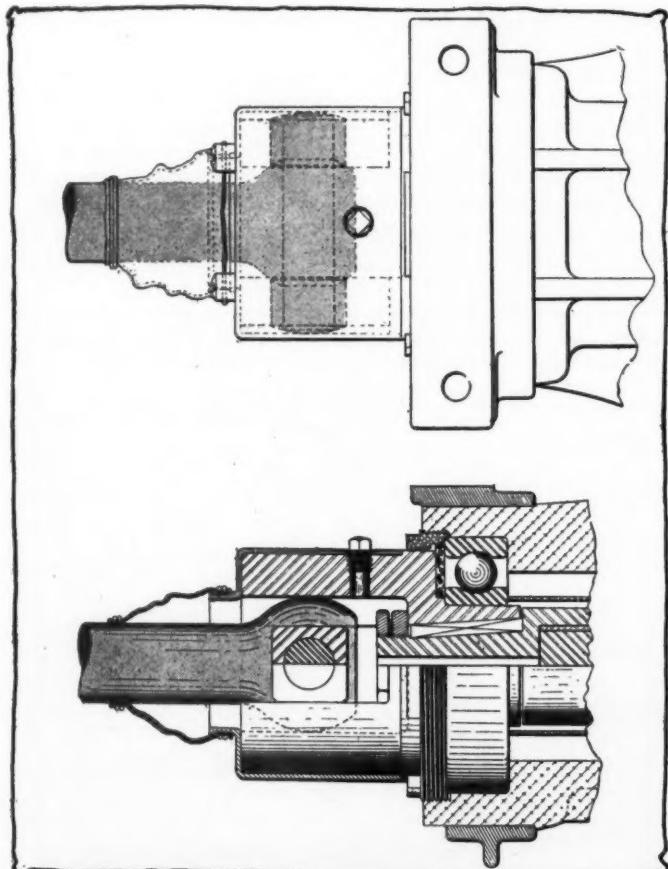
National universal joint of the sliding type used on 40 horsepower cars
